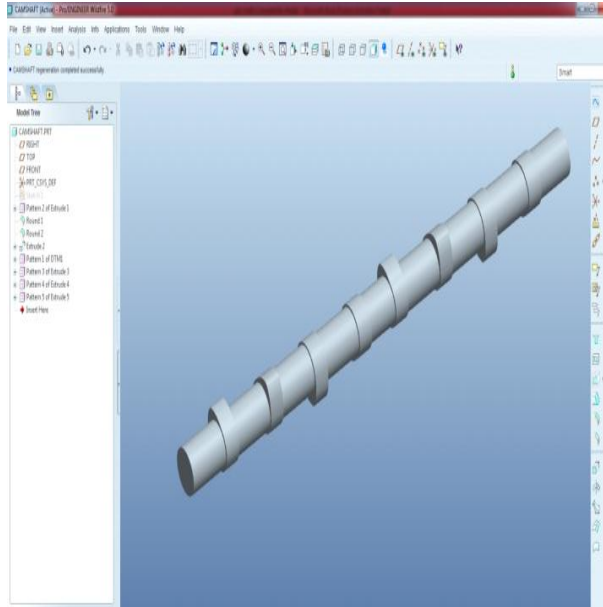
CAM SHAFT IN PART DESIGN MODEL OF Pro/E
